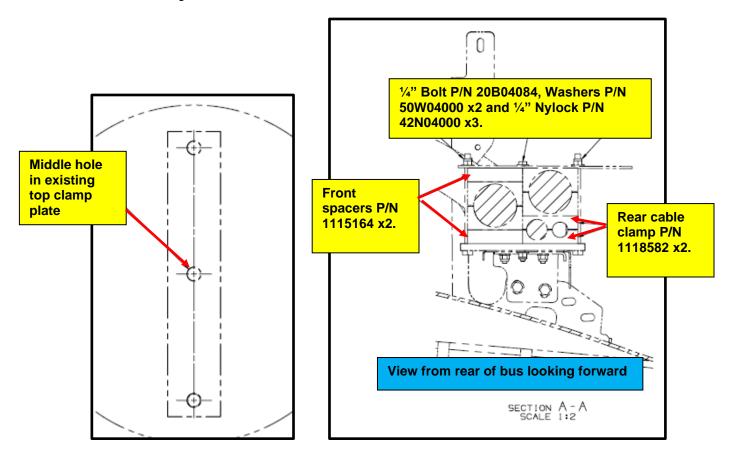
Zone A view from rear looking forward - Drill hole in plate and reassemble clamp bundle
